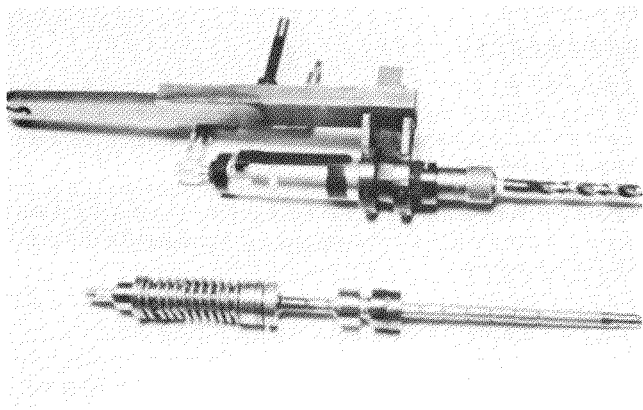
The top tool is a drill used to open the center guide tube. The lower tool is the internal tube cutting device.
